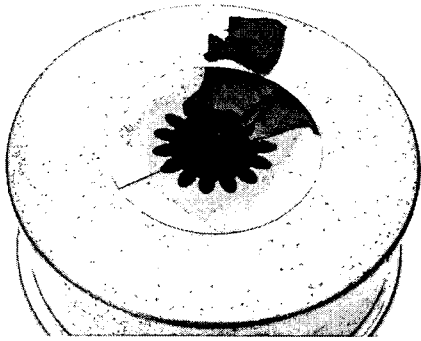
Fracture of cold forging die for spur gear (upsetting type)
